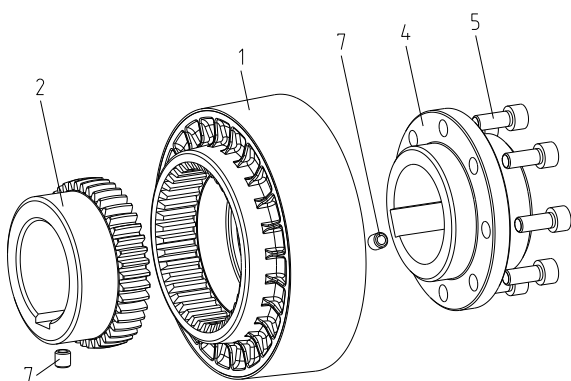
BoWex-ELASTIC® type HEW1 Compact
